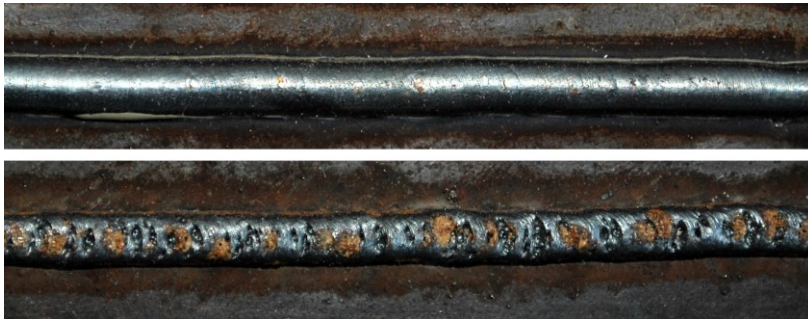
Weld bead deposited with shielding gas (above), and without shielding gas (below)
